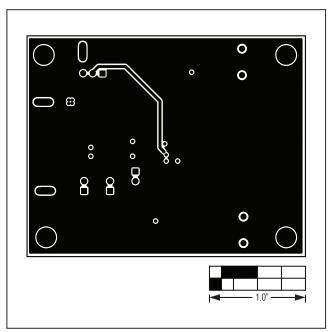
MAX14532E EV Kit PCB Layout—Solder Side
